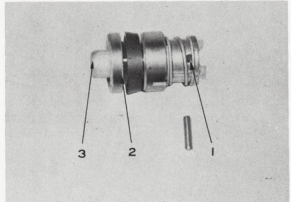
Inspection of W7104 Hydraulic Piston
